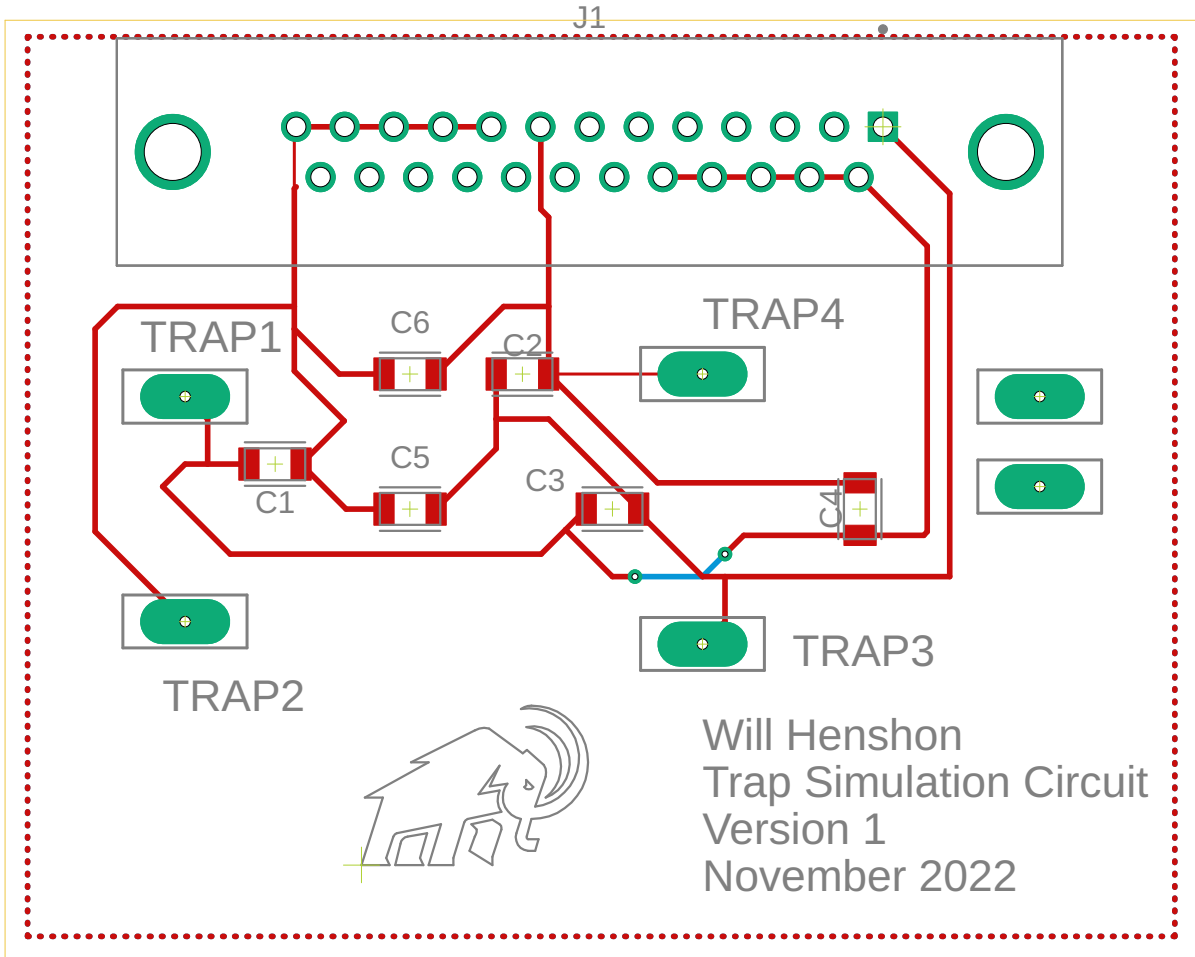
Eagle PCB design for the dummy trap circuit. The dimensions of the board are 5.3 cm by 6.7 cm.
